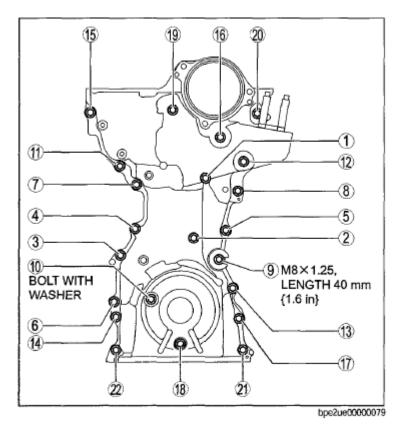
Identifying Drive Belt Auto Tensioner Bolt Hole
